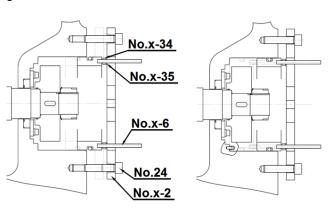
Special Tools for Balance Piston Sleeve(M) of GH250S/L
